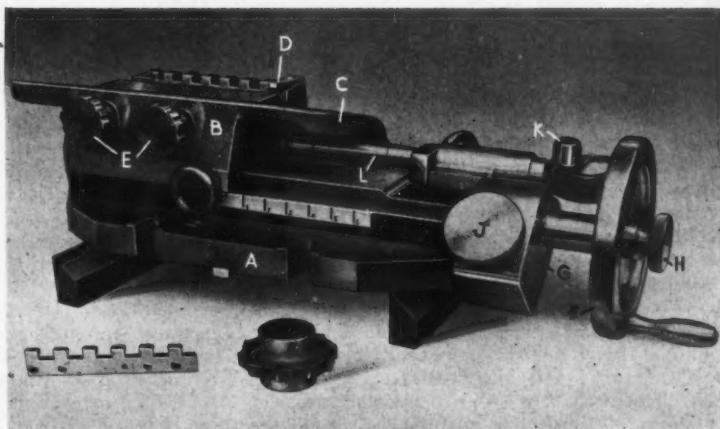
The fixture which has been designed and built by the Monotype Corporation, Ltd., for positioning notch bars for finish milling the notches
